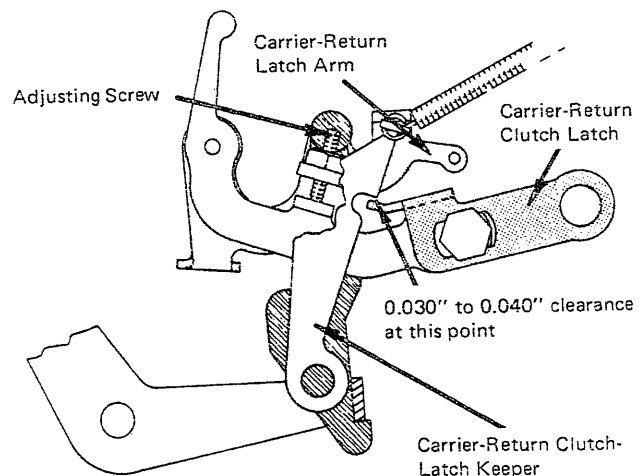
Clutch Latch Overthrow, (Level 1) 11-Inch Machine Only
